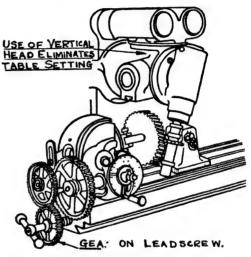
Milling Helical Gear using Vertical Head Attachment
